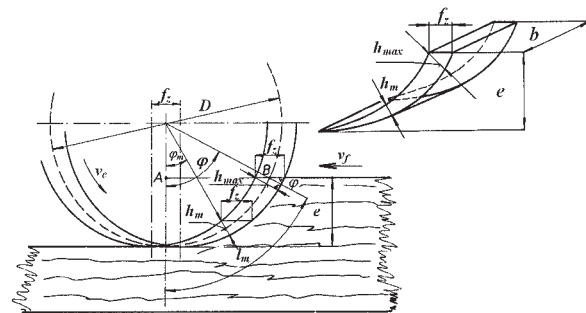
The scheme of cutting chips by cylindrical milling cutter
